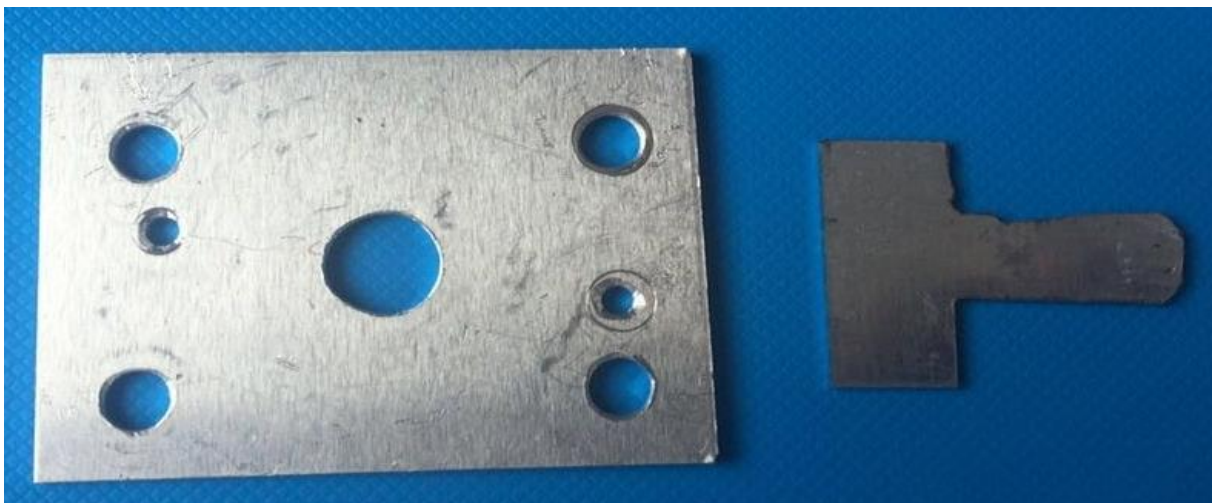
10 Stepper Motor Support Part and T Part to fix Vacuum Pie Holder Part.
